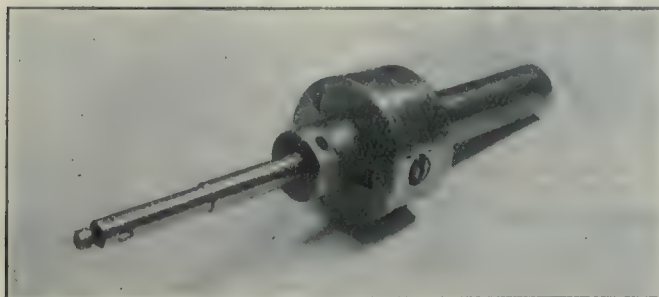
ECCENTRIC BORING BAR HOLDER.
